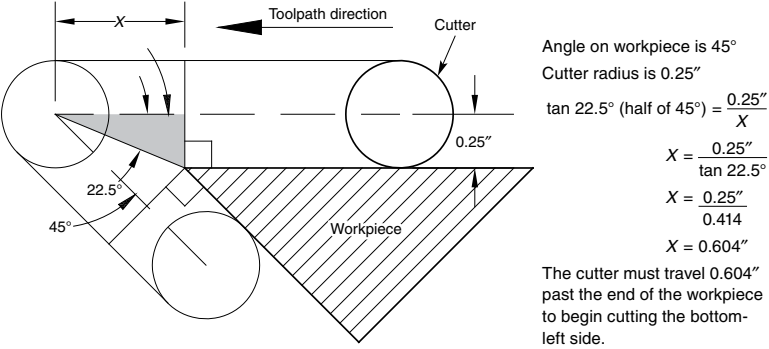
Illustration showing the triangle that must be solved to calculate the position of a cutter when cutting an acute angle on a workpiece.
